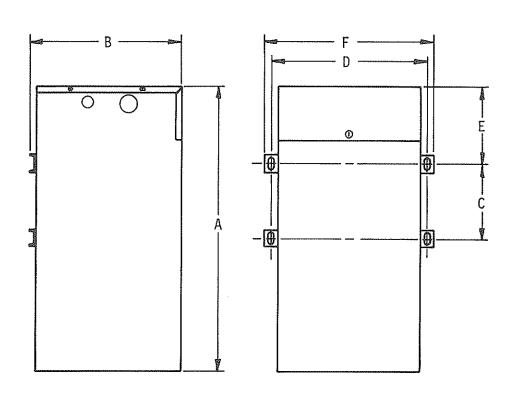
POWER CONDITIONER DIMENSIONAL DRAWINGS
